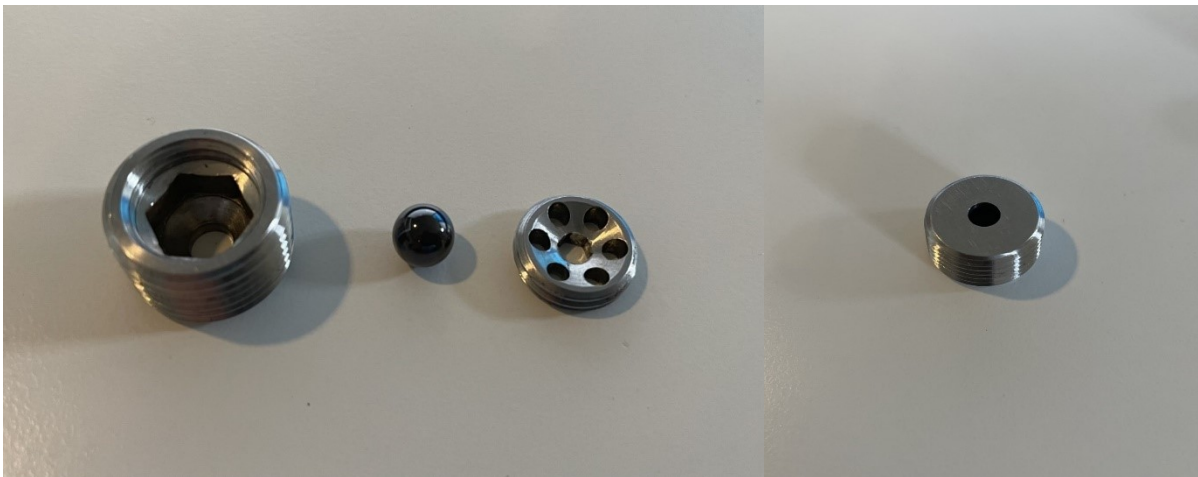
Injection valve's top view, ball, lid, and injection valve's bottom view (*left to right*)
